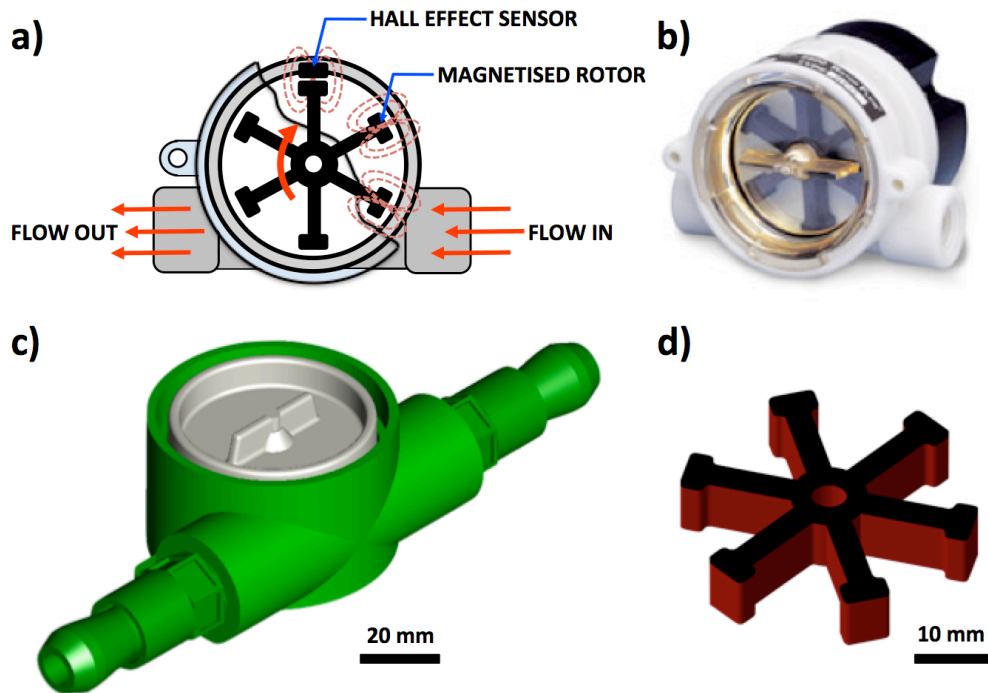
a) Schematic detailing the operation of a commercially available flow sensor, b) picture of commercially available flow sensor, c) CAD design of 3D printable sensor and d) CAD design of 3D printable central impeller.
